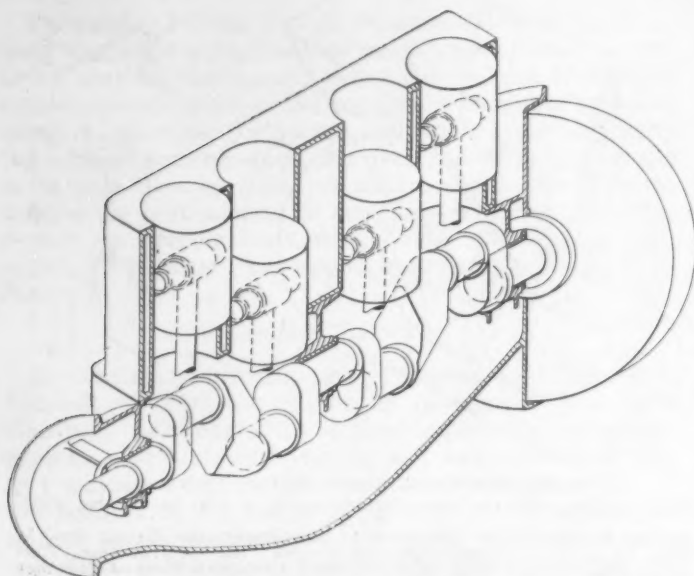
CONVENTIONAL FOUR-CYLINDER ENGINE IN WHICH THE CRANKS ARE TWO AND TWO, 180 DEG. APART
